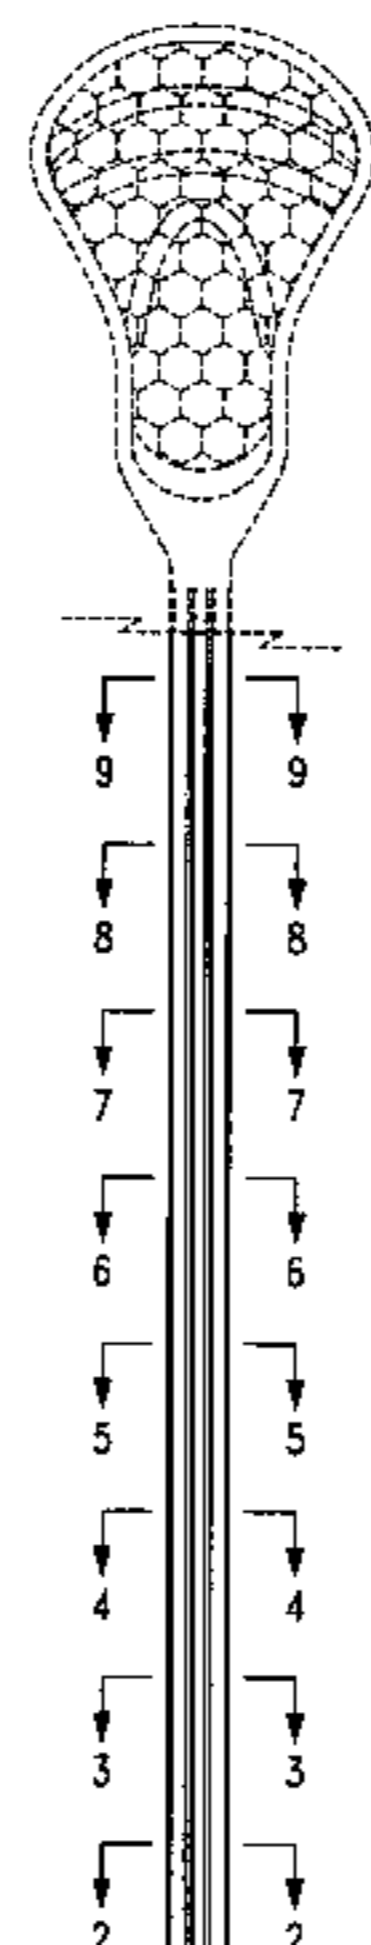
is a rear elevational view showing the design for the lacrosse stick component of FIG. 1;
